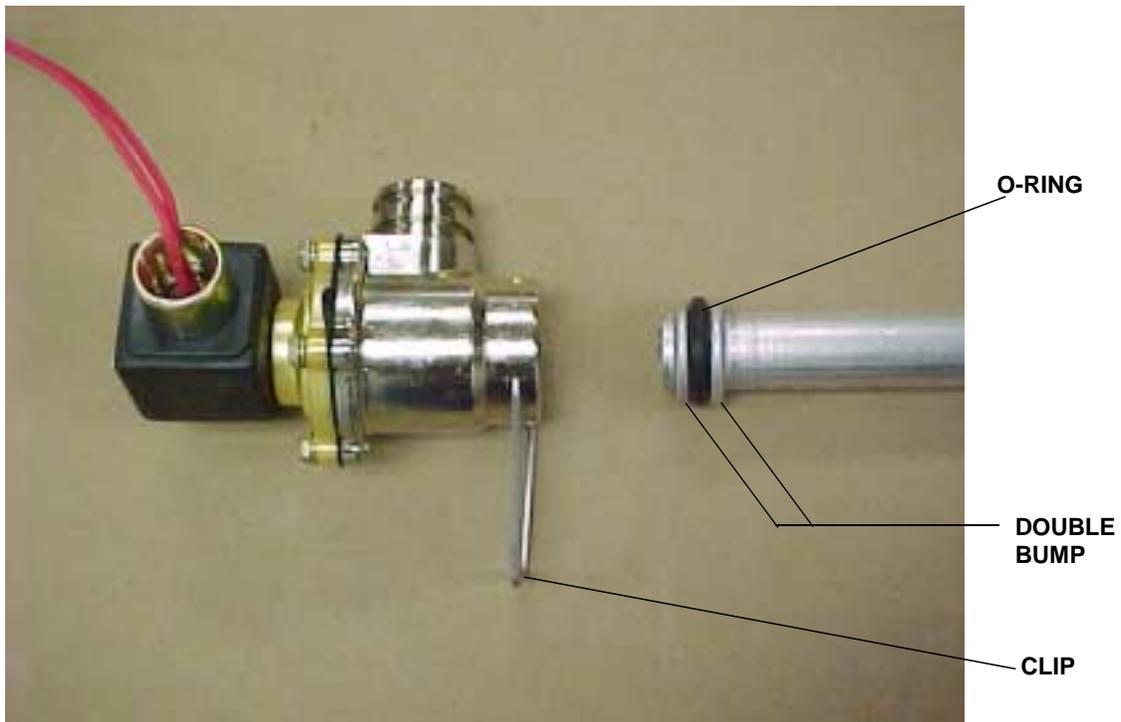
DOUBLE BUMP TUBE BETWEEN VALVE AND HOSE OUTLET.
